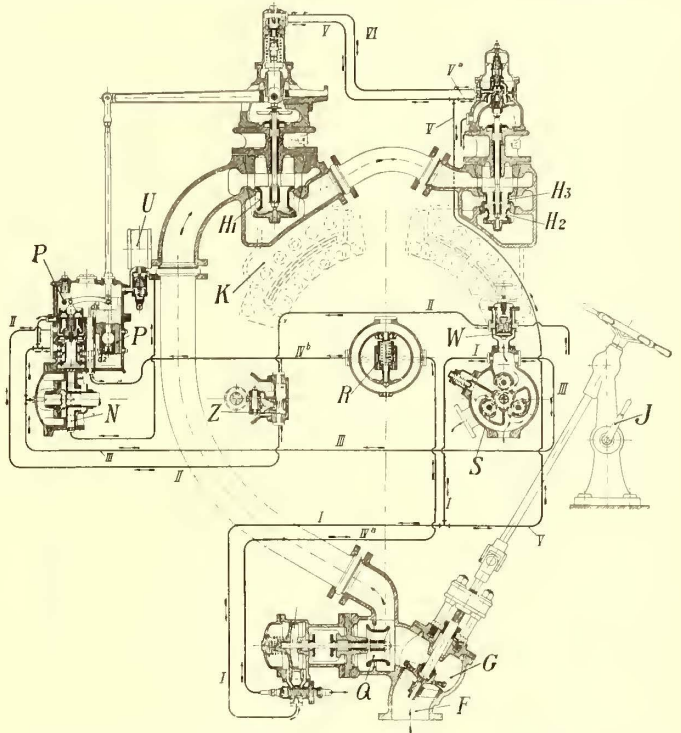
End Cross-Section of 10,000-hp Turbine, Showing Oil-Pressure System
